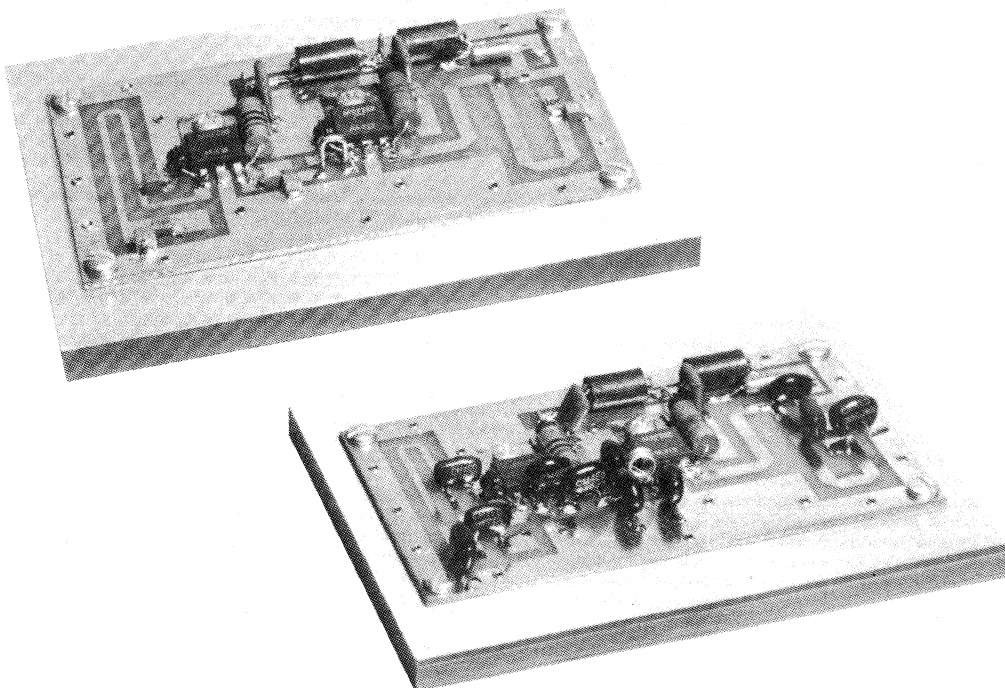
Engineering Models. A Common Board Layout is Used for Both Versions
